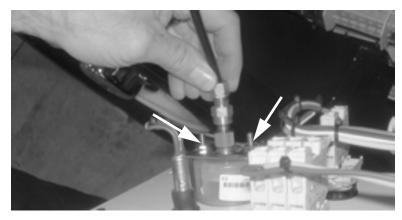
Remove the hose from the vacuum gauge, then take out the screws holding it to the bracket.
